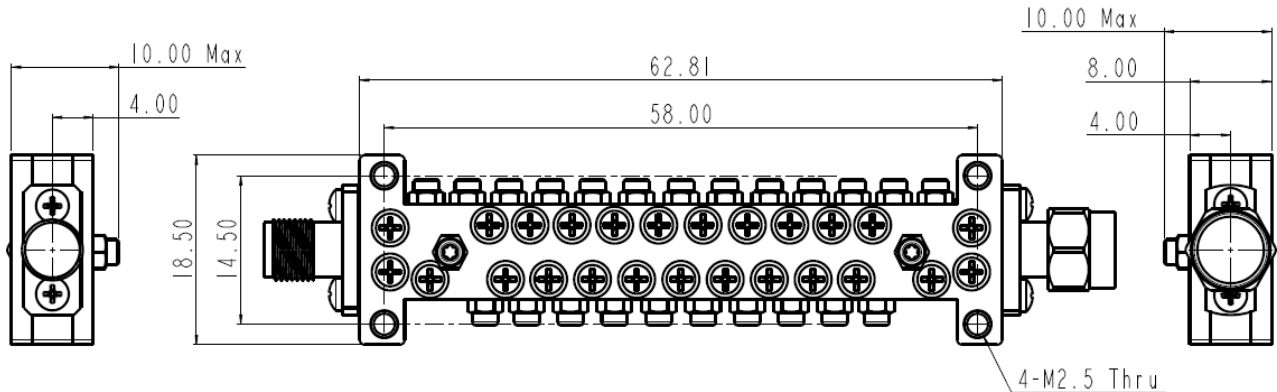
JX-CF1-26.95G31.05G-30S2 front panel layout
